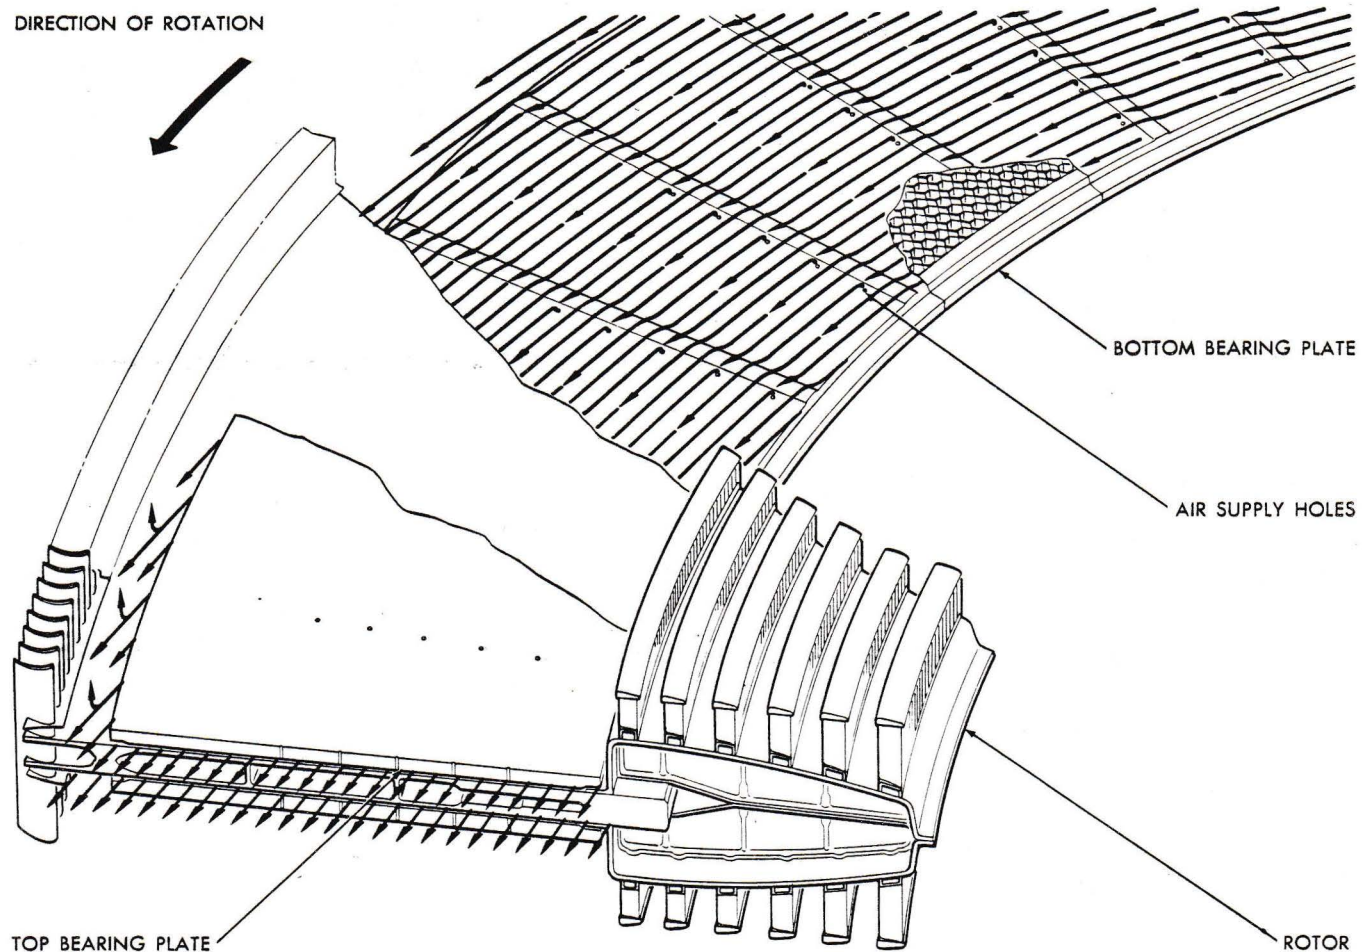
PERSPECTIVE VIEW SHOWING TRUE PATH OF BEARING AIR
